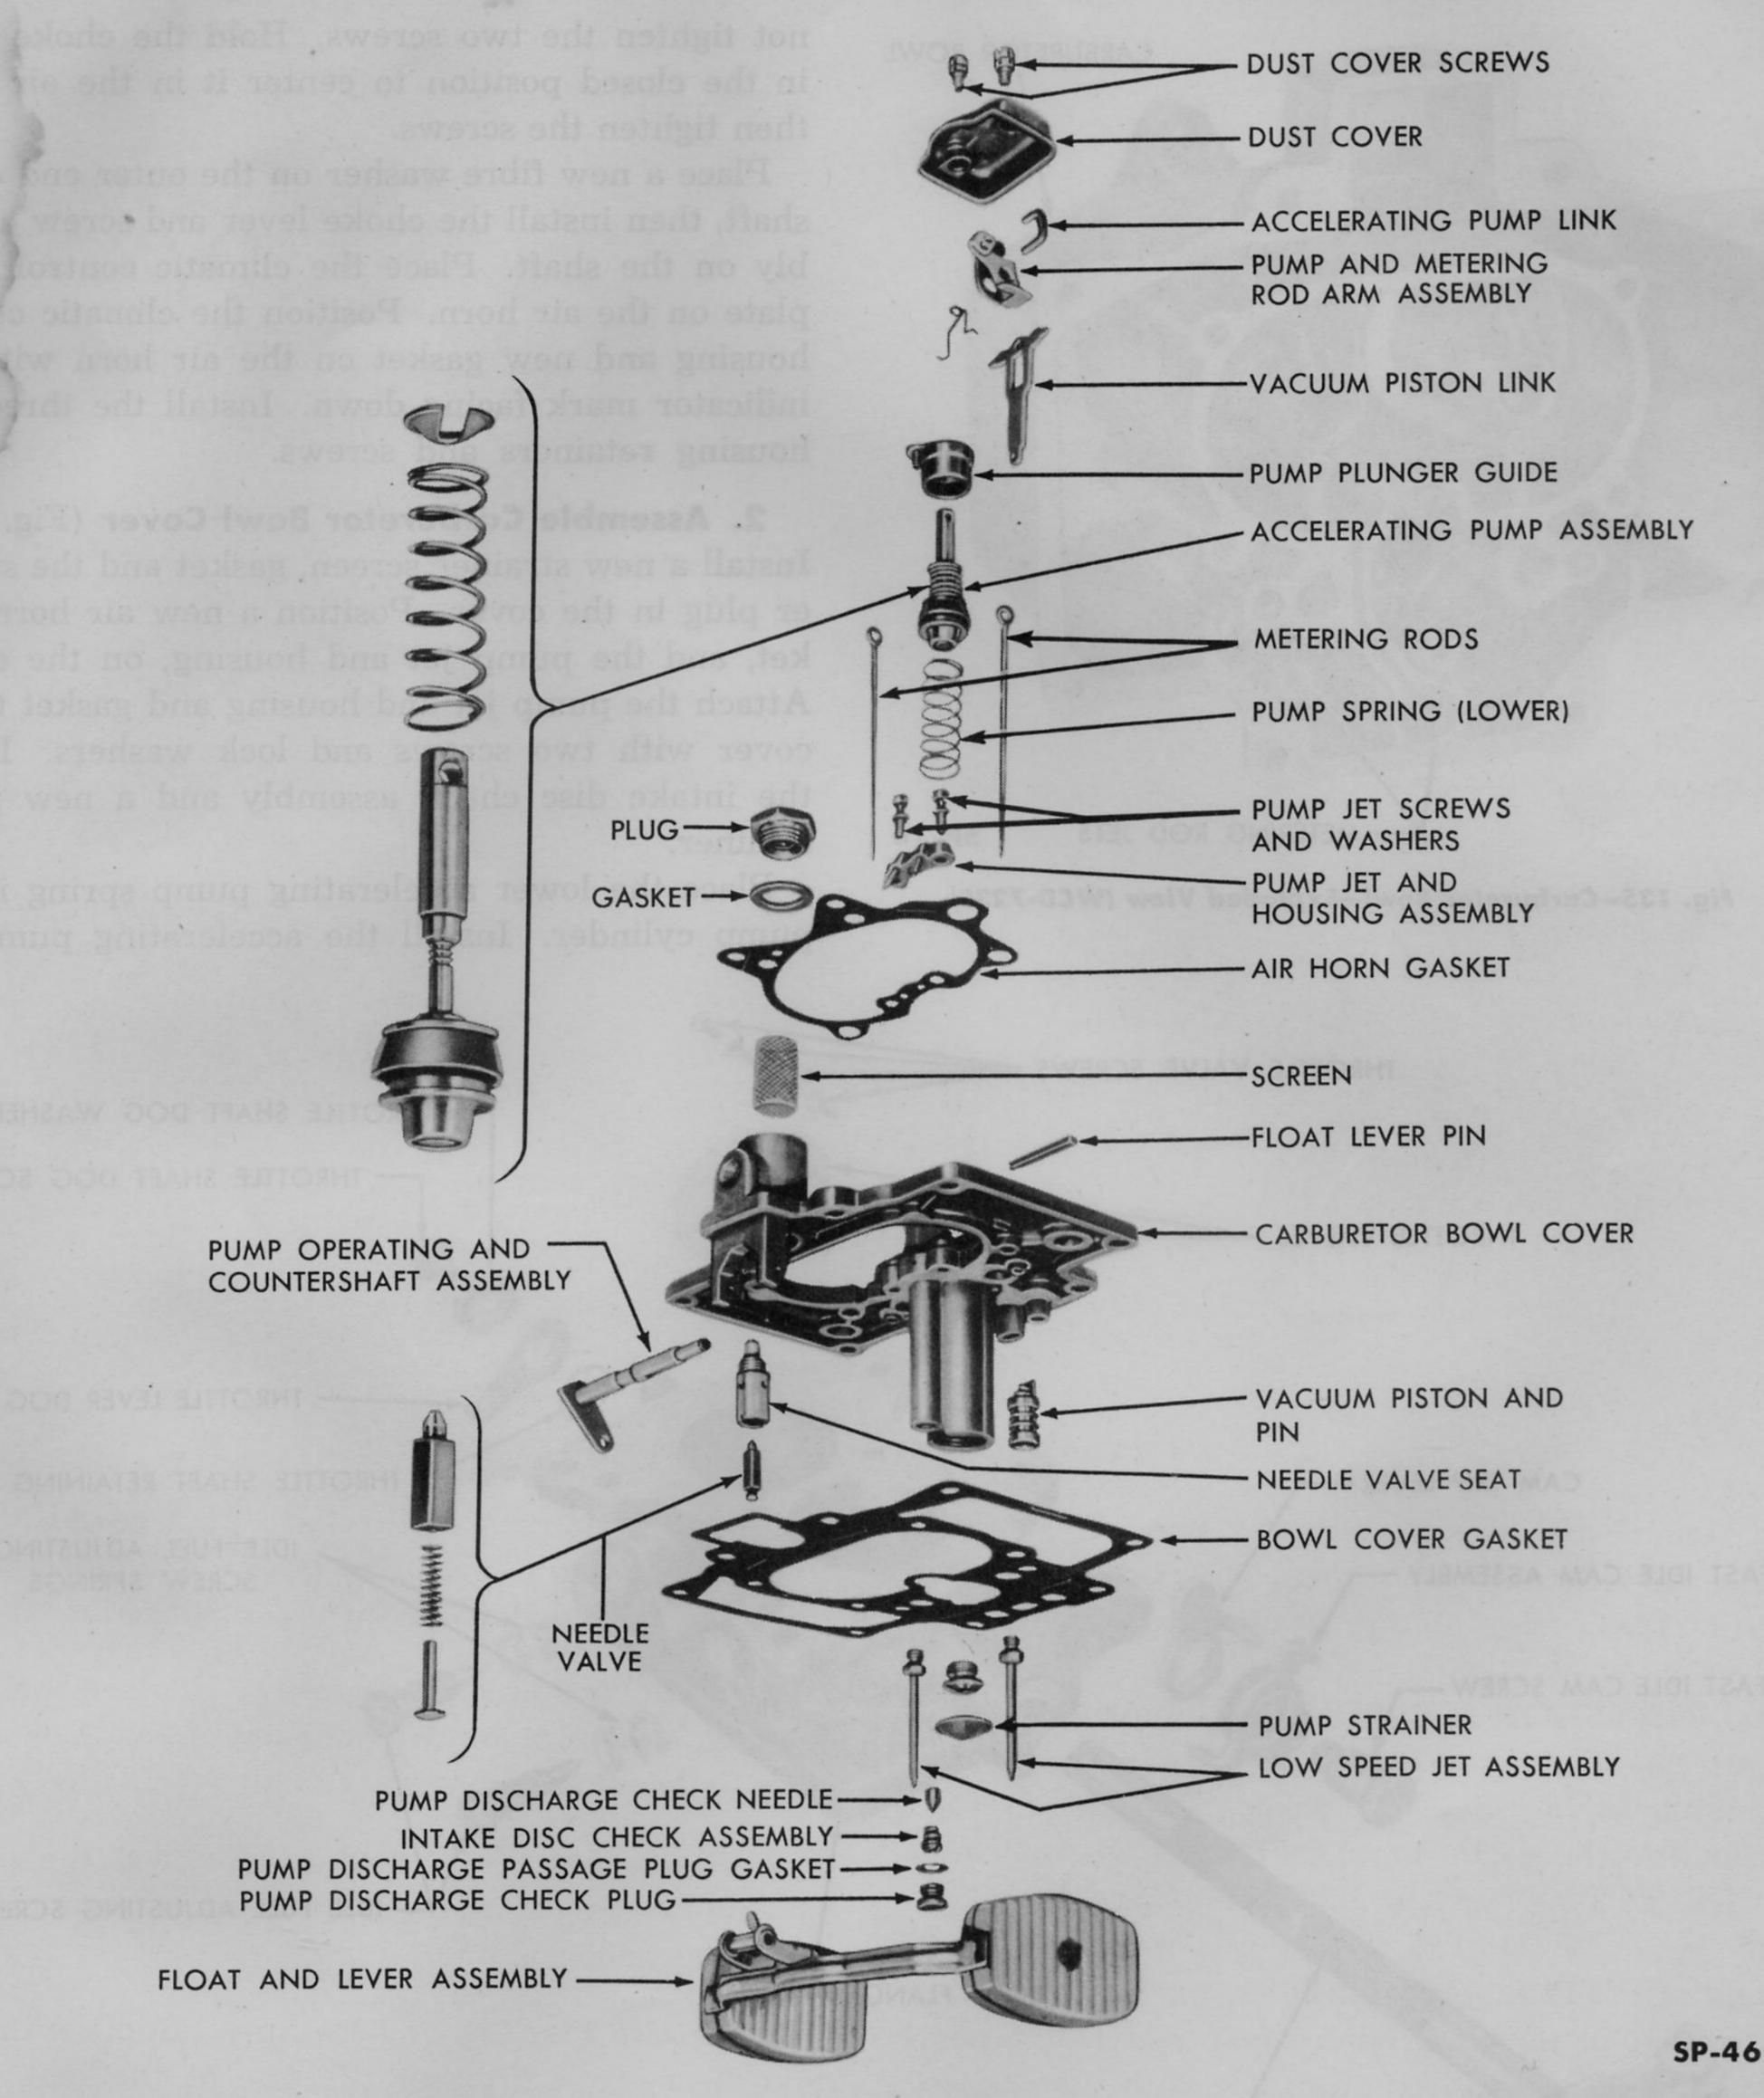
Carburetor Bowl Cover—Exploded View (WCD-7235)
